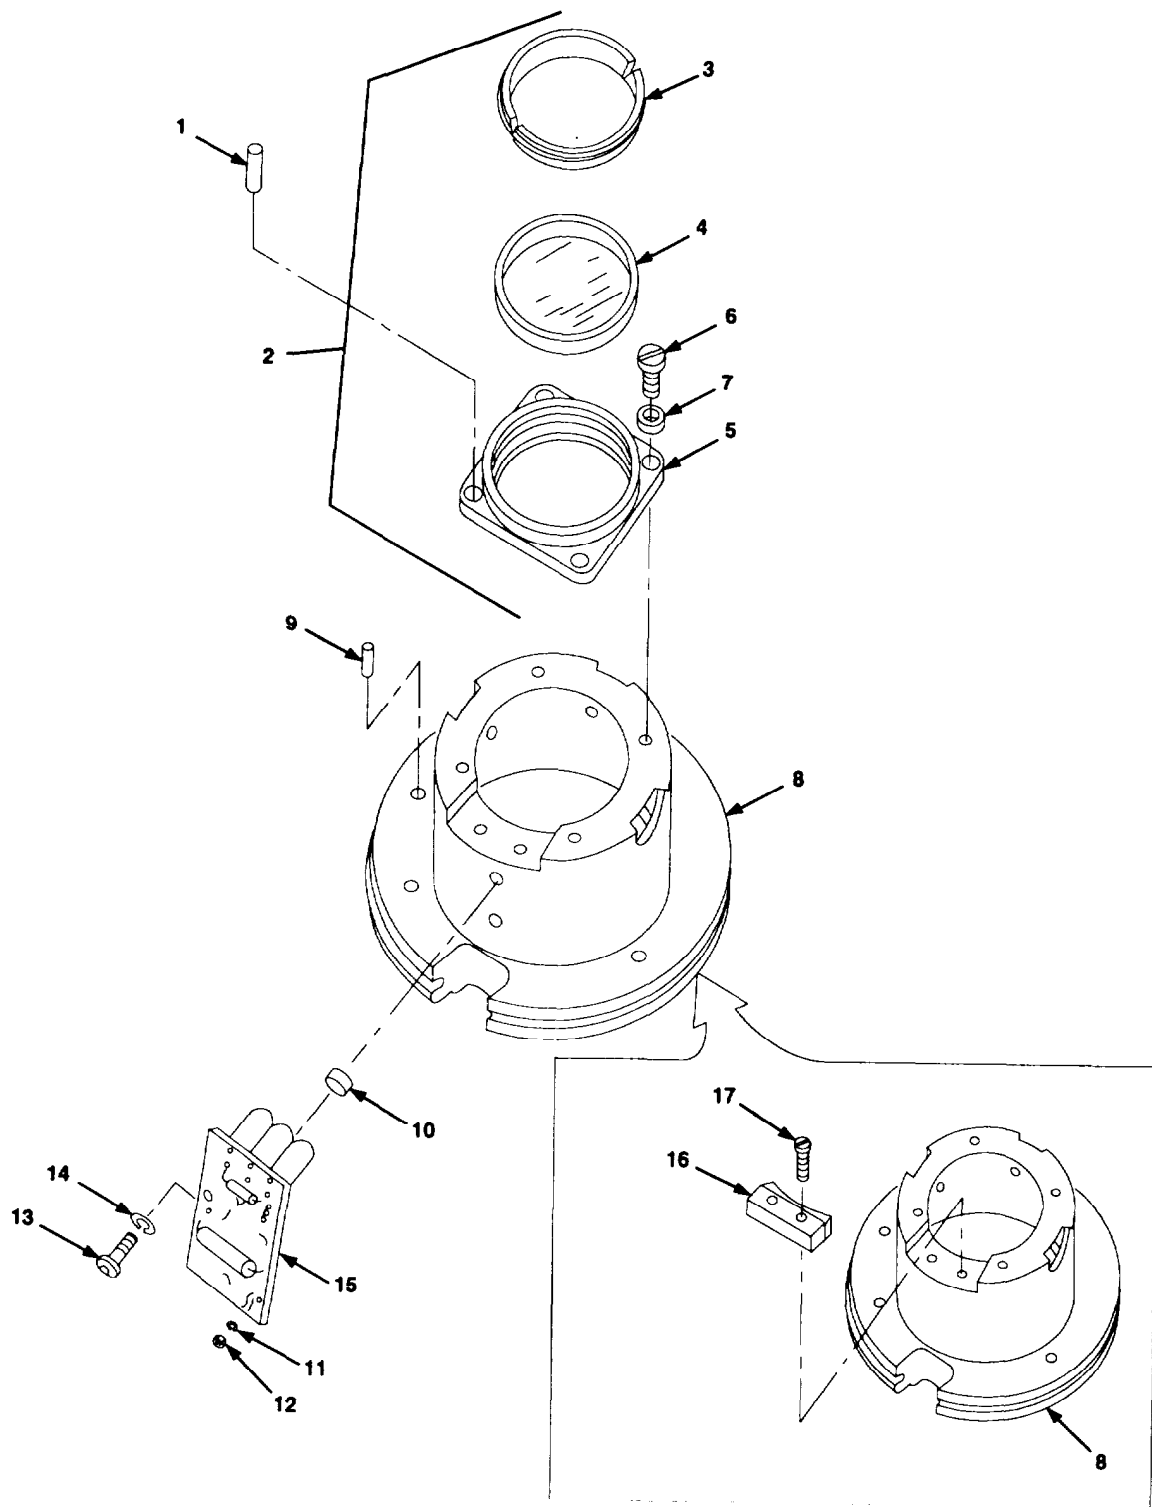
Reticle Cage Assembly 12599350 and 11834878 Including Cell Assembly 11834879
